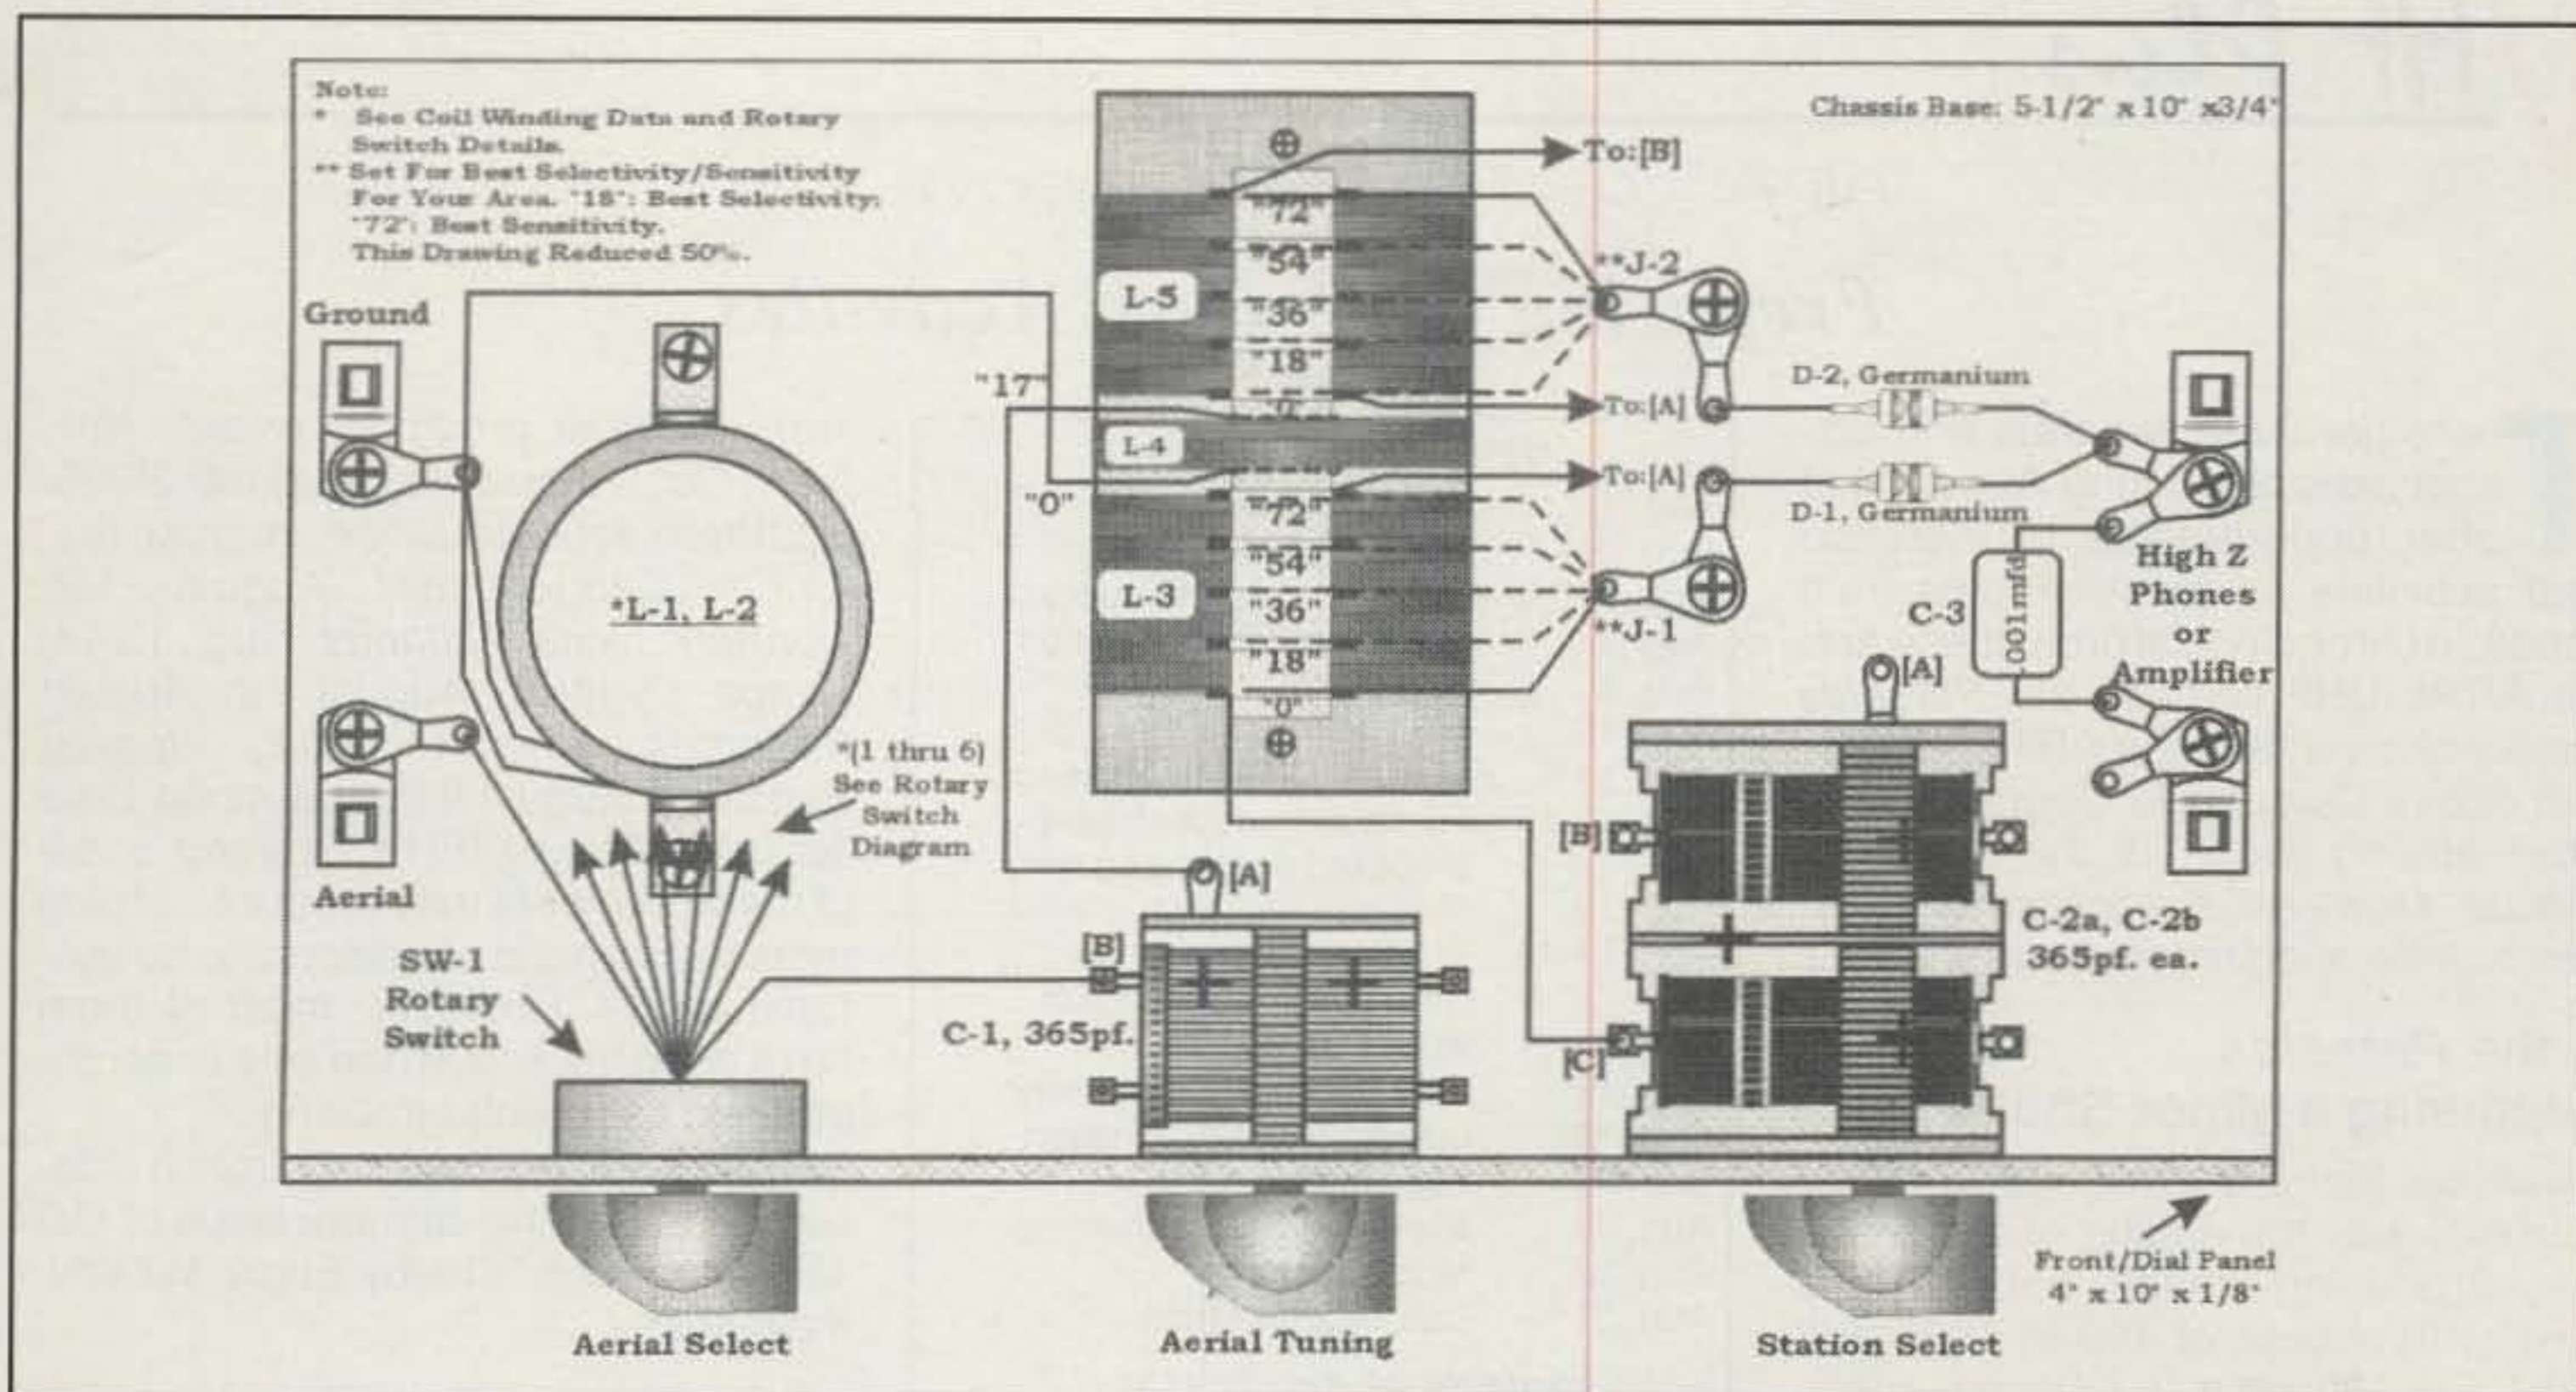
Suggested parts layout for the push-pull crystal set. When carefully assembled, this little rig becomes a work of art.
